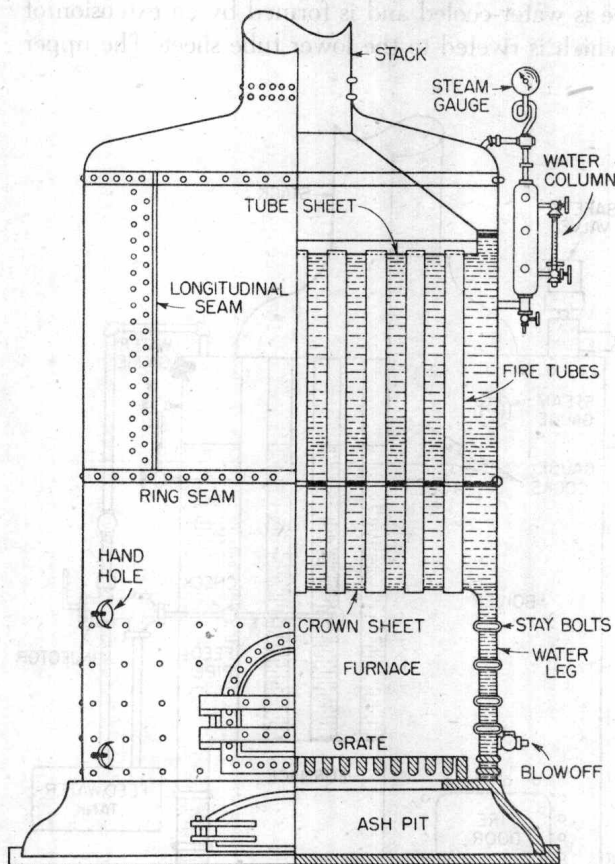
Sectional view of vertical boiler—submerged-tube type.
